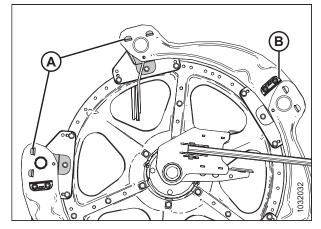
Reel Endshield Removed – Outboard Tail End
